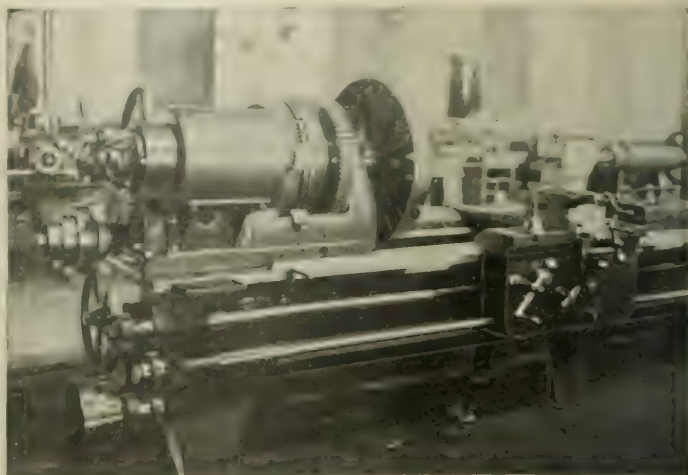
MOTOR DRIVING 29-INCH LATHE.
